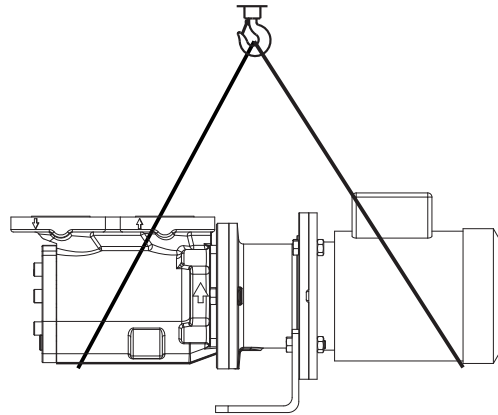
Fastening the lifting gear to the pump unit horizontally (as illustrated)
